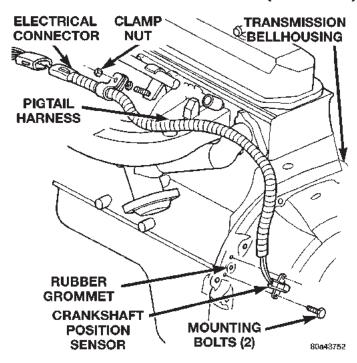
Crankshaft Position Sensor —4.0L Engine
